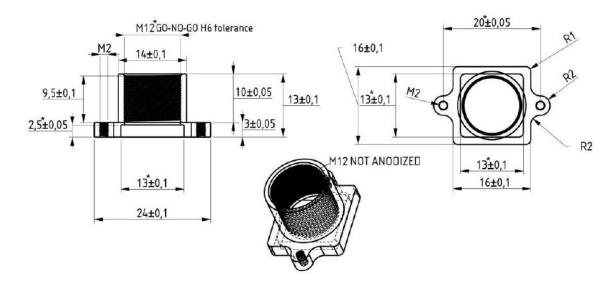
S-Mount Metal Lens Holder Outline Dimension
